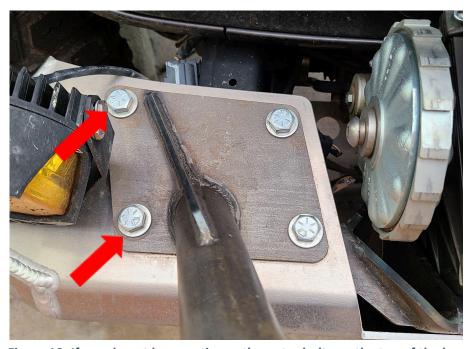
If you do not have a stinger, the outer bolts on the top of the bumper must be installed at this time. The red arrows call out the necessary bolts, the other 4 may be installed if desired.
